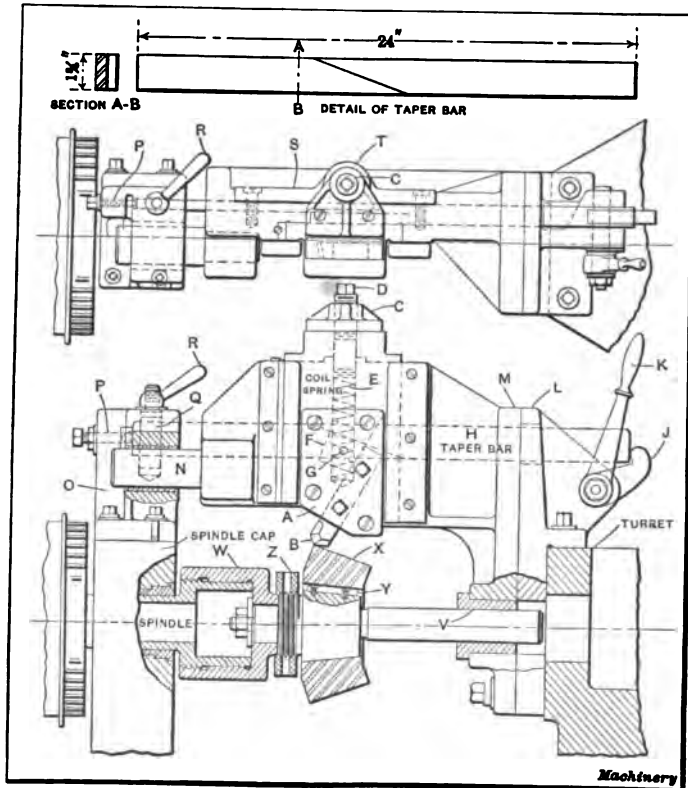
Taper Attachment for Machining a Bevel Pinion
